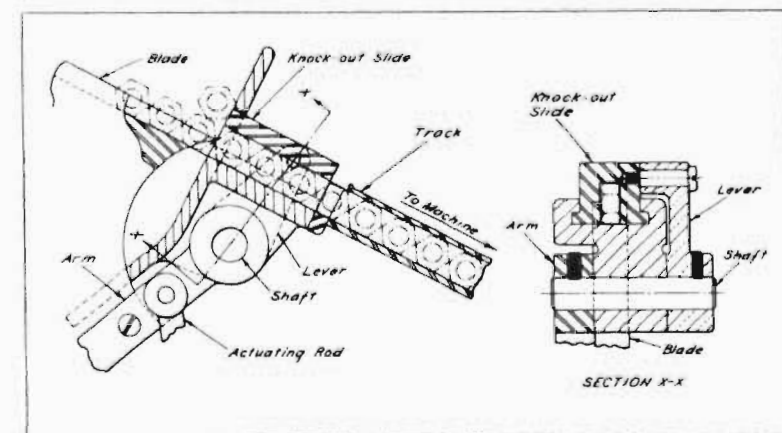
Enlarged sectional view through the knock-out mechanism of hopper seen in Fig. 1. Oscillation of the knock-out slide clears the track mouth of improperly positioned parts.
